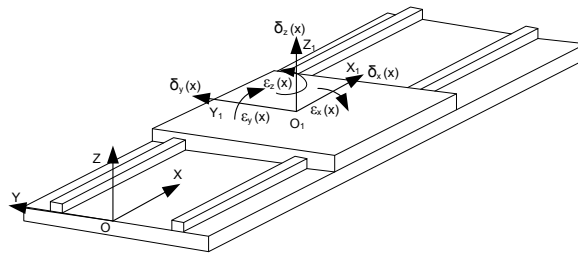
Six d.o.f. error motion of a machine-tool carriage system.
